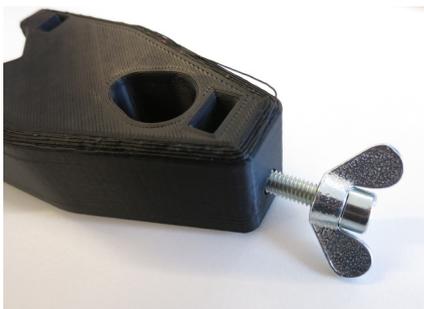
An alternative wing screw made with a wing nut and cylinder head screw.
